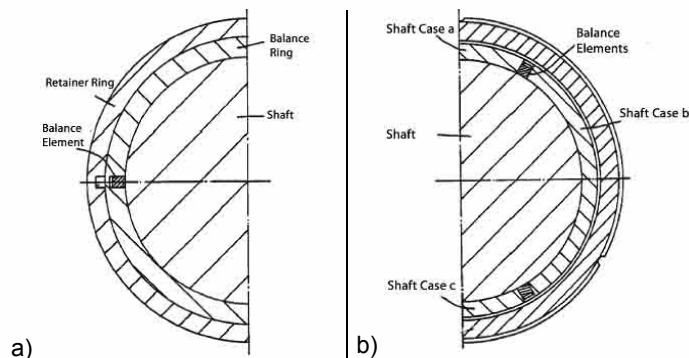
Cross sections by the shaft and the retainer ring in the place I (a) and place II-II (b) in Figure 7 [12]
